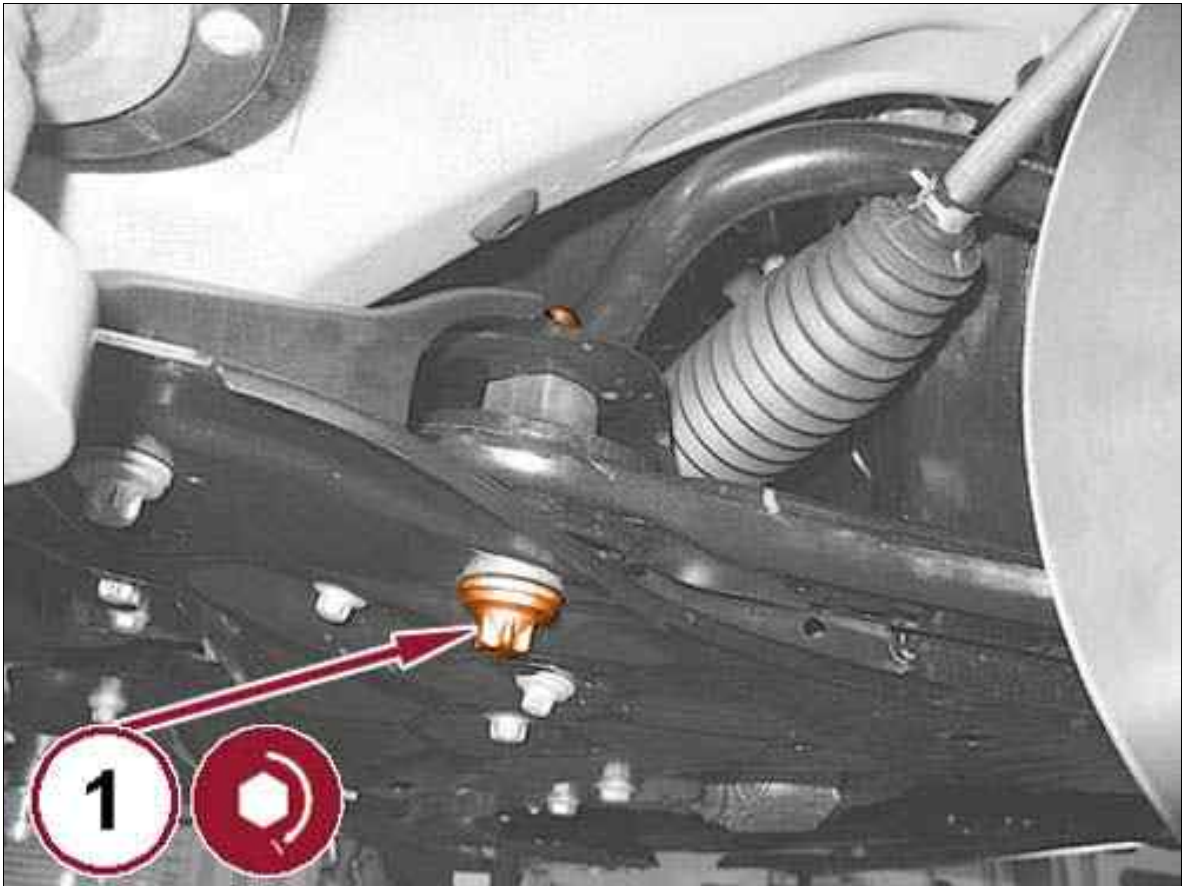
Installing Lower Control Arm & Cradle Front Bolt
